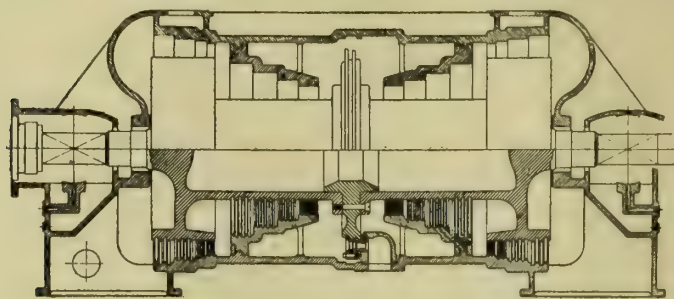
DRUM-TYPE TURBINE—LARGE SIZE.
